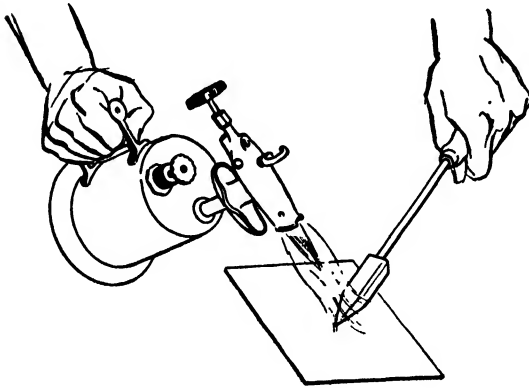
Heat may be applied directly to the work while soldering. This method is especially good when soldering heavy or thick pieces.
